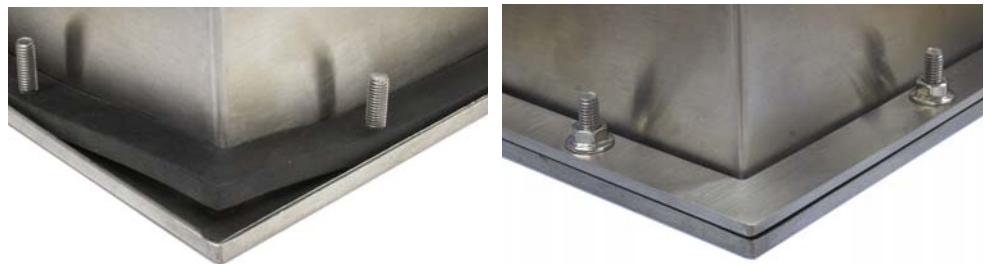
Gasket on Enclosure (left) and Backing Plate Installed (right)
